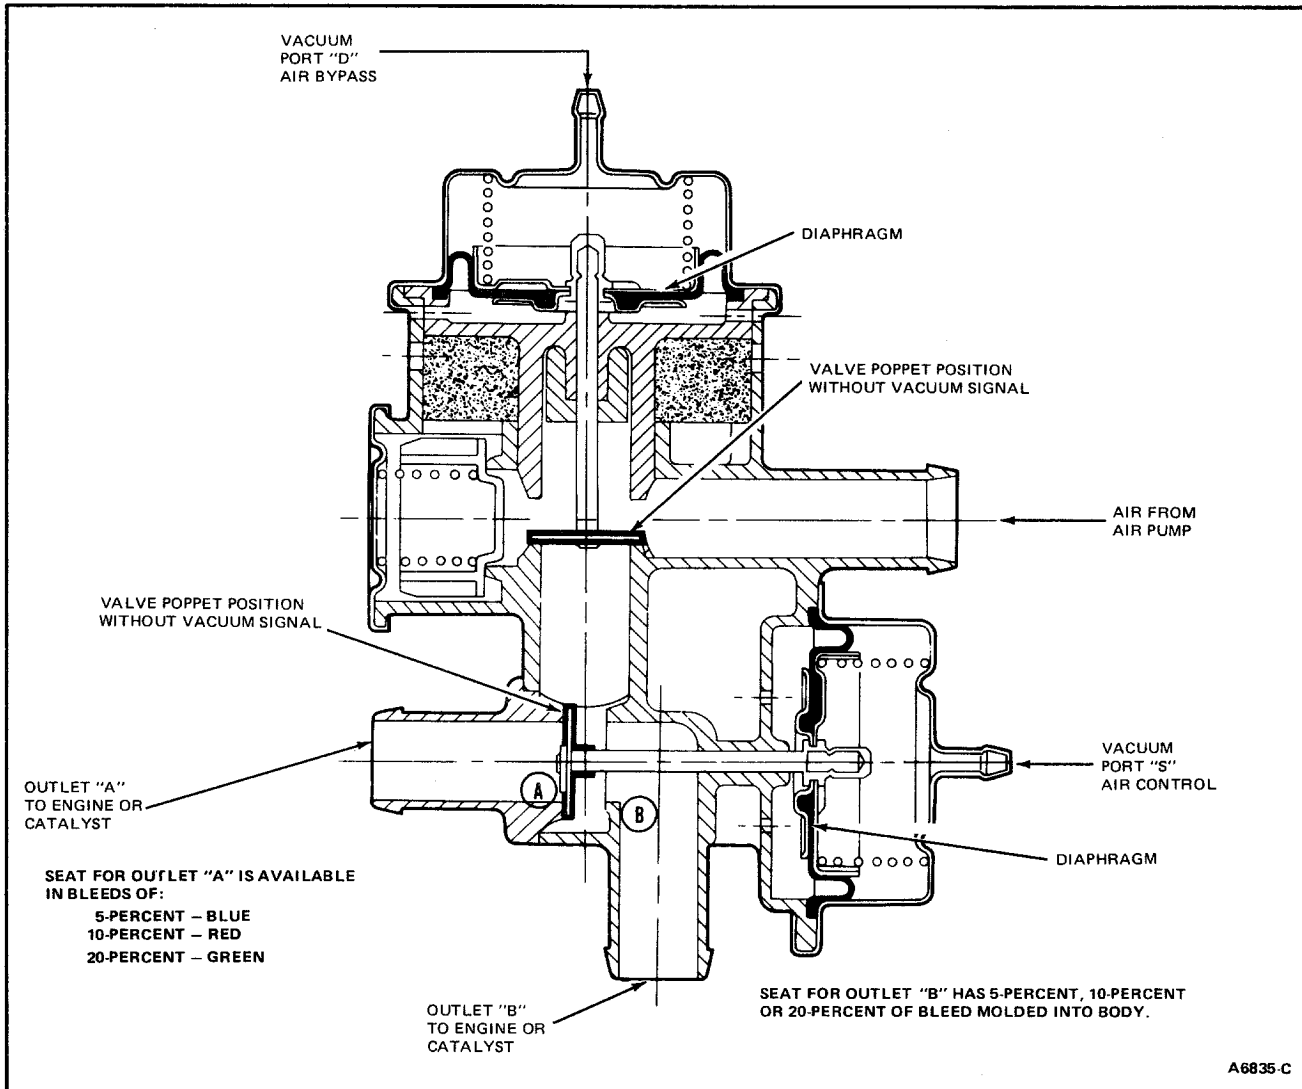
Valve Assembly Exhaust Air Supply Control (Normally Closed) With Bleed
